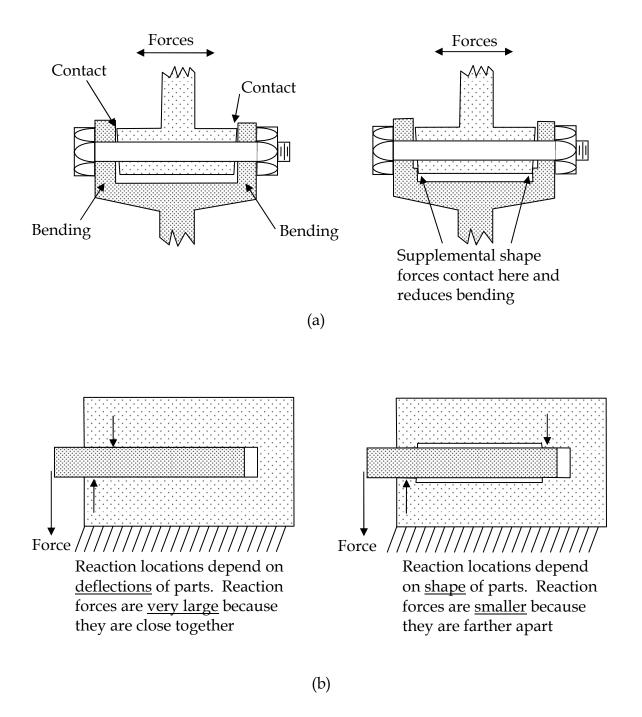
Supplemental shapes used to: (a) reduce bending in a clevis joint, and (b) reduce bending stresses in a pin by shifting the load bearing points.
